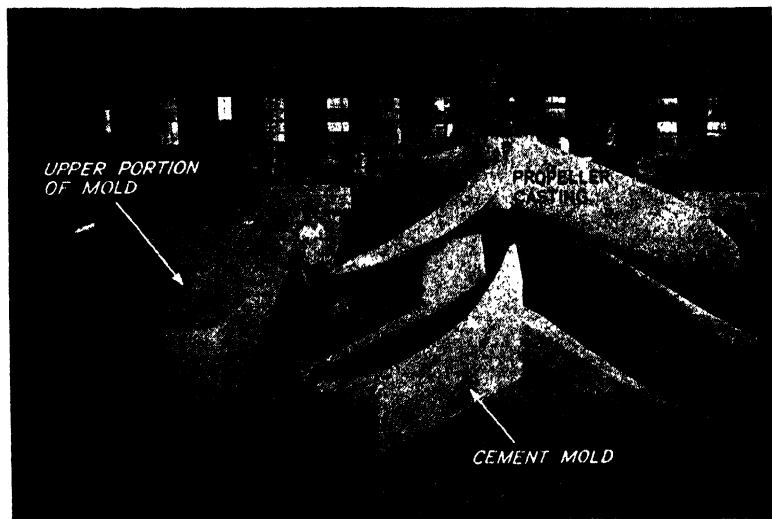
A propeller casting. The completed propeller casting is being removed from the cement mold. This casting will now be ground to the finished dimensions.
